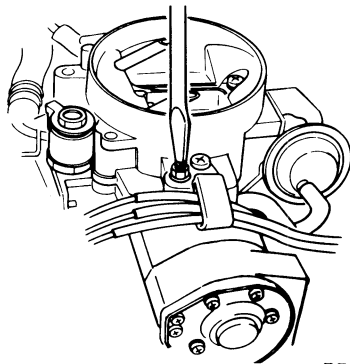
Pushing B.C.D.D. Adjusting Screw
